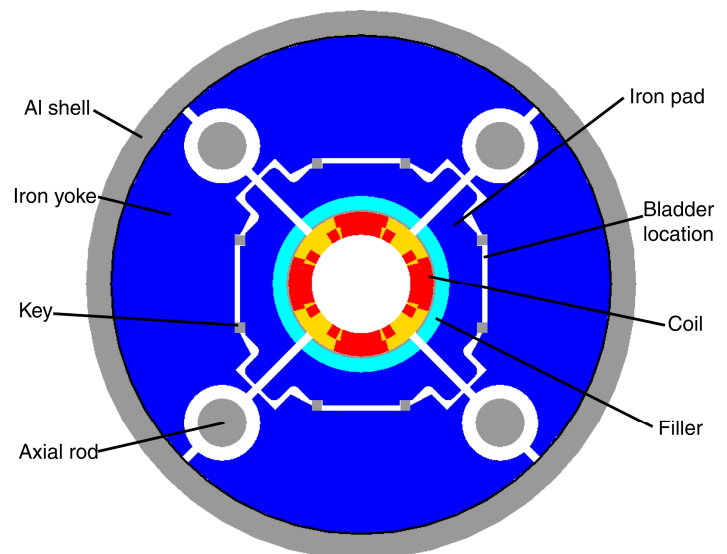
TQS01 magnet cross-section showing coils, fillers, pads, keys, yokes, skin and axial supporting rods.
